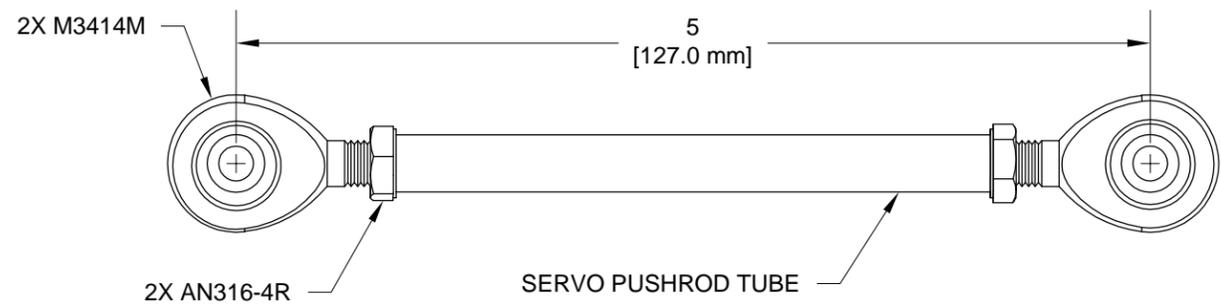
ROLL SERVO PUSHROD ASSEMBLY
